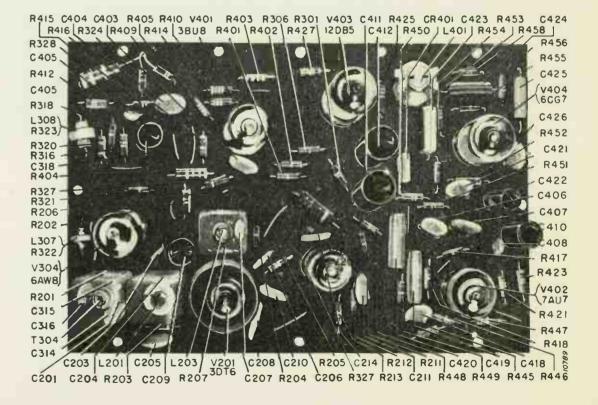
View of Component Side of Printed Wiring Board A5780-1 Used in All Chassis
